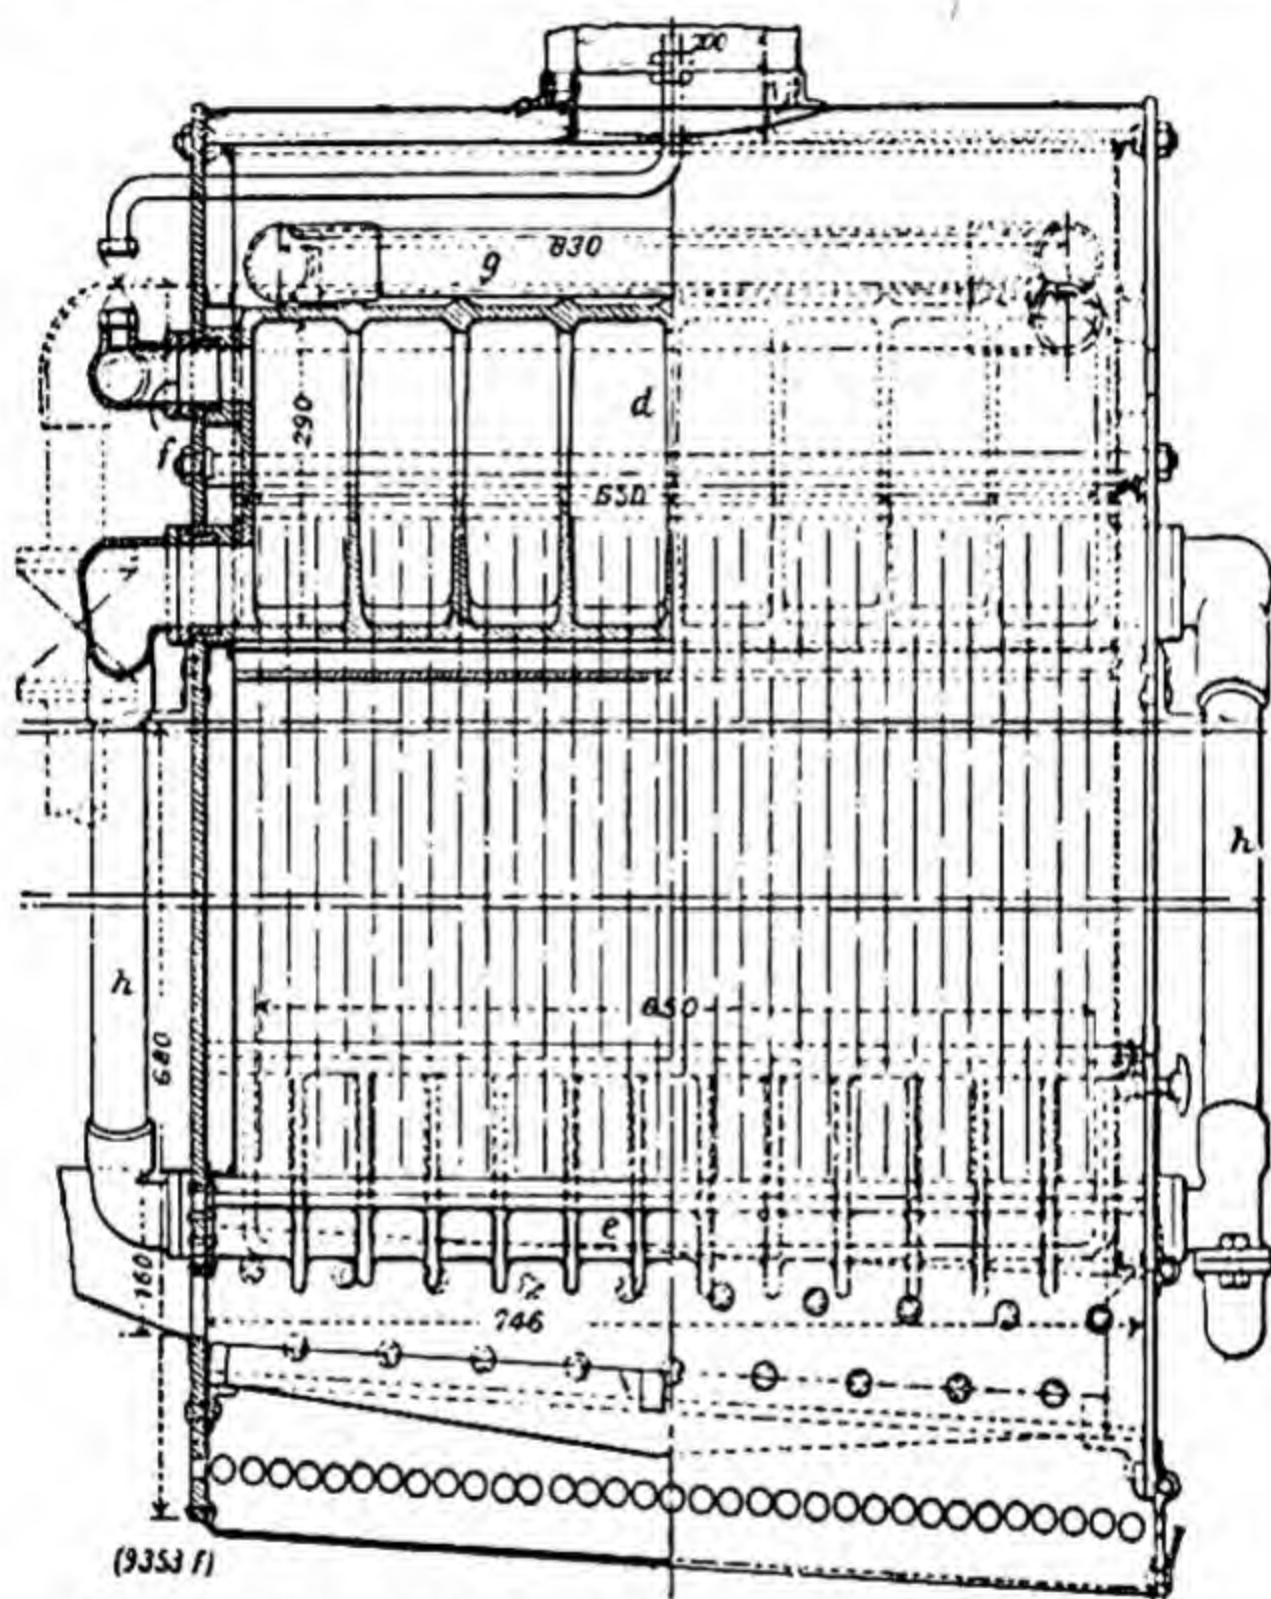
Sectional side elevation of steam wagon water-tube boiler.
